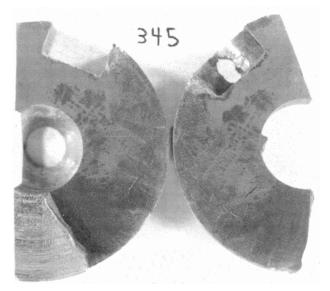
Fracture Surface of the Turbine Shaft (Figure 29) Showing Fatigue Extending about 60% across the Section.
